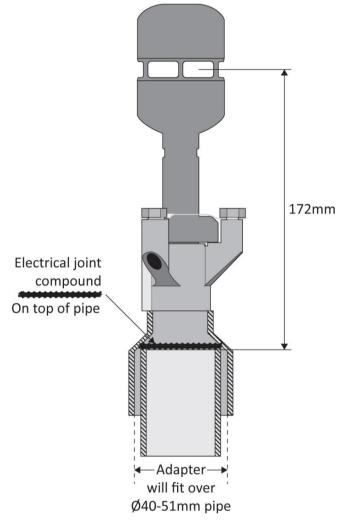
Pipe Mount Sensor and Adapter (all dimensions in mm)
